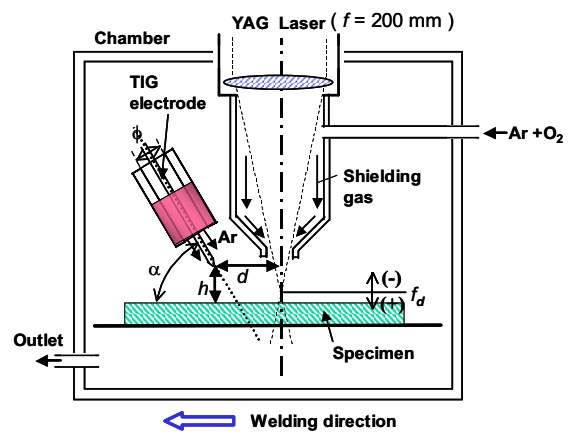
Chamber producing pure Ar and Ar- $O_2$  mixture atmospheres and schematic experimental setup in YAG laser and TIG arc hybrid welding.
